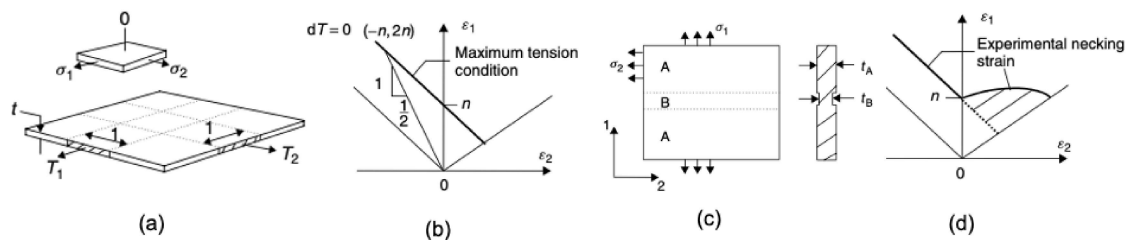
(a) Uniform sheet in plane stress process, (b) FLC obtained on perfect sheet,
